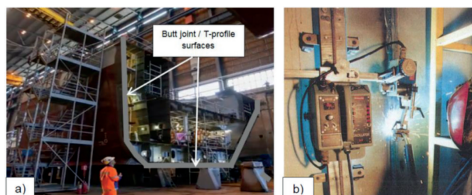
a) Joint Surfaces of an Arctic Structure Block Section; b) Mechanized Vertical FCAW in Hull Production [6].
